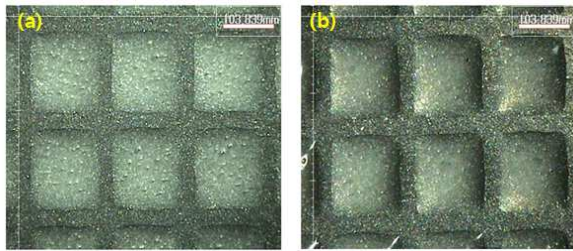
Photographs of embossed patterns at position P3 after (a) injection molding and (b) injection-compression molding
